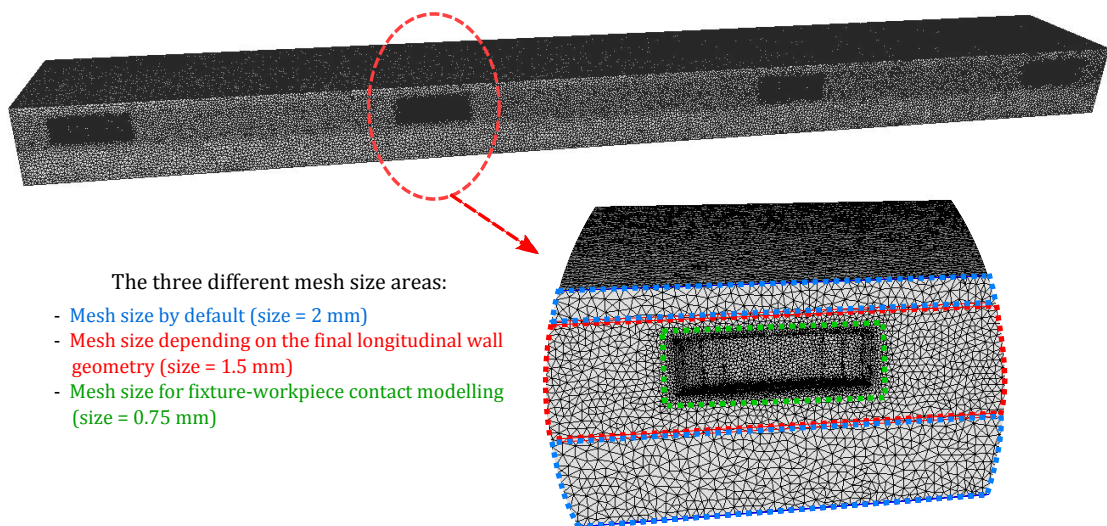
The initial mesh representing the prepared workpiece: Different mesh sizes have been defined depending on the final part geometry and the fixture-workpiece contact
